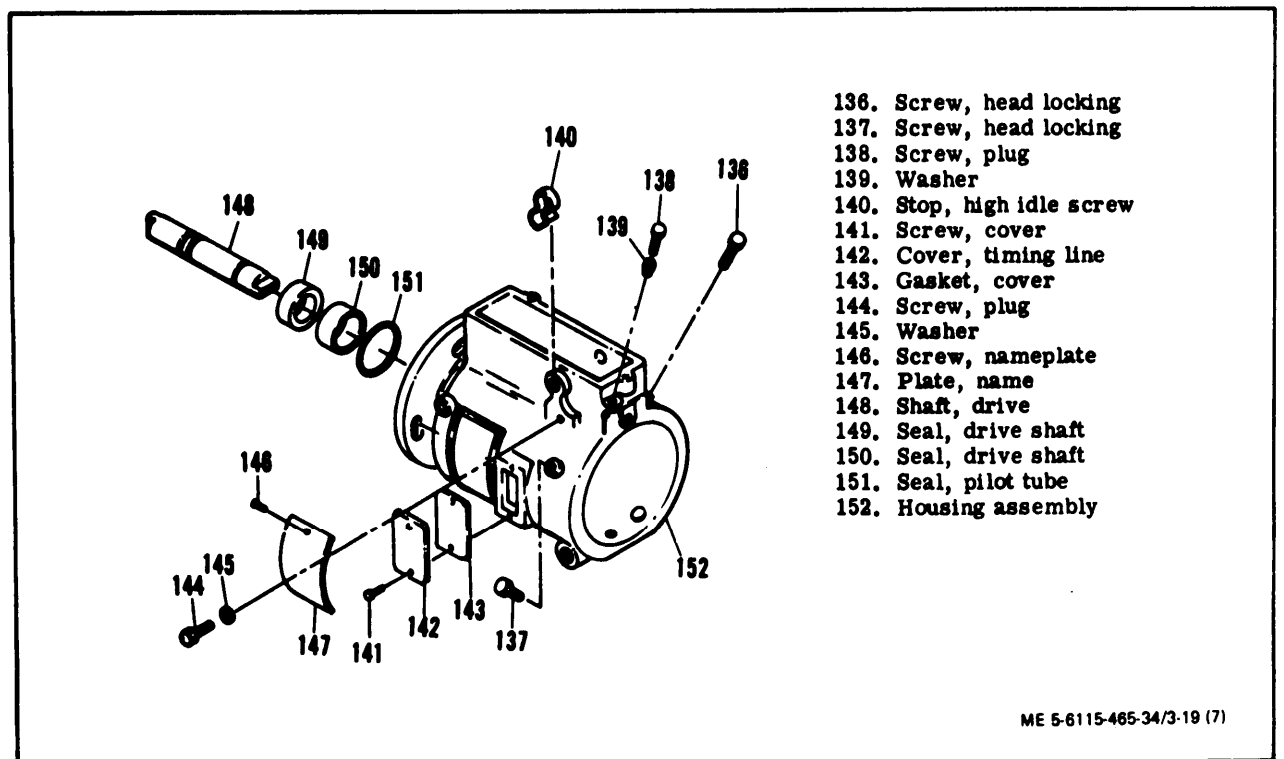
Fuel Injection Pump, Exploded View (Sheet 7 of 7)
